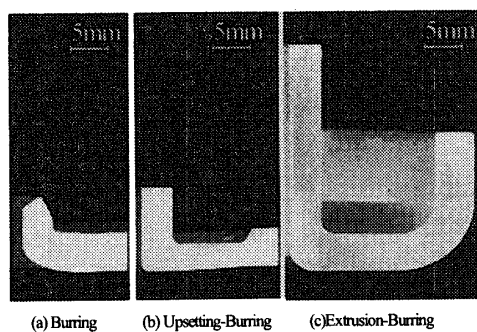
Product profile by burring, upsetting-burring and extrusion burring
